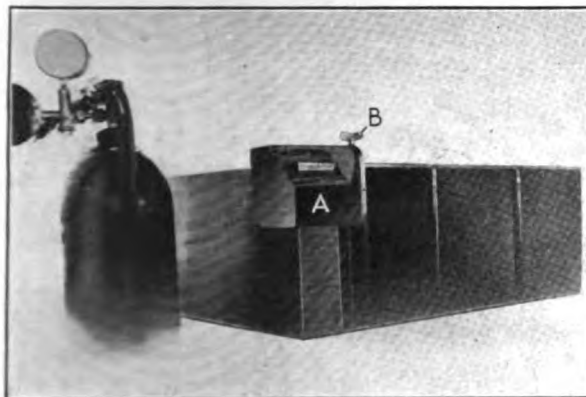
FIXTURE FOR WELDING CORNERS
